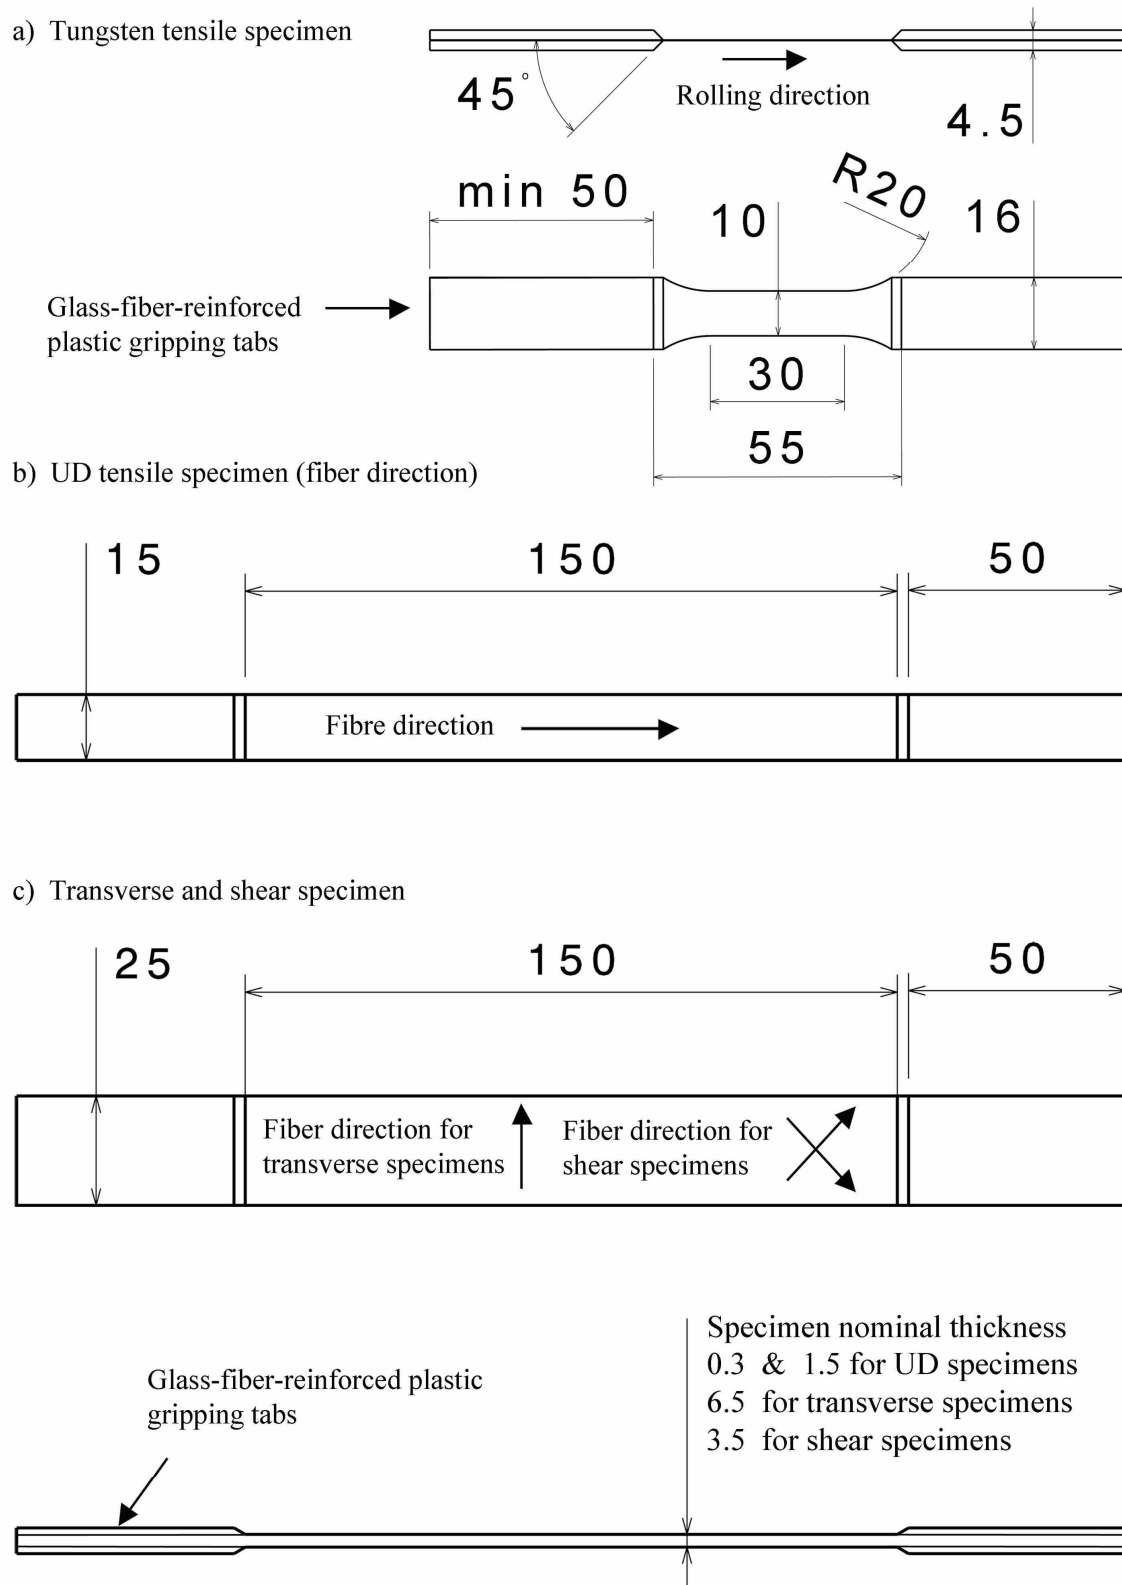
Test specimen geometries for: (a) tungsten-based specimens; (b) CFRP tensile specimens, and; (c) CFRP tensile transverse and shear specimens. Dimensions are given in millimeters.
